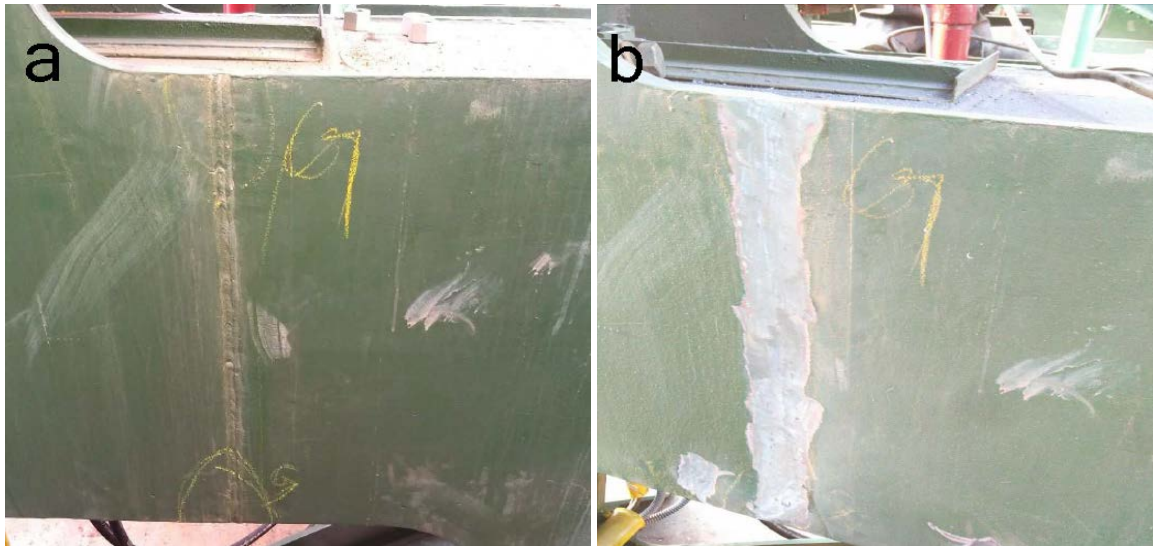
Improper DBS0 weld execution before a. and after b. rectification
